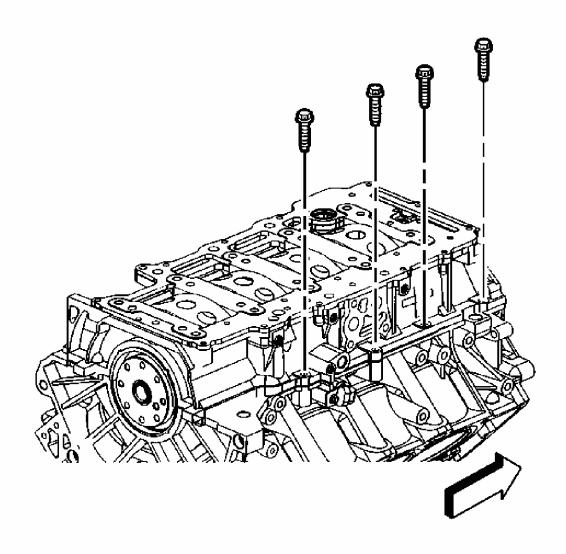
Identifying Crankcase Perimeter Retaining Bolts On Left Side Of Engine
